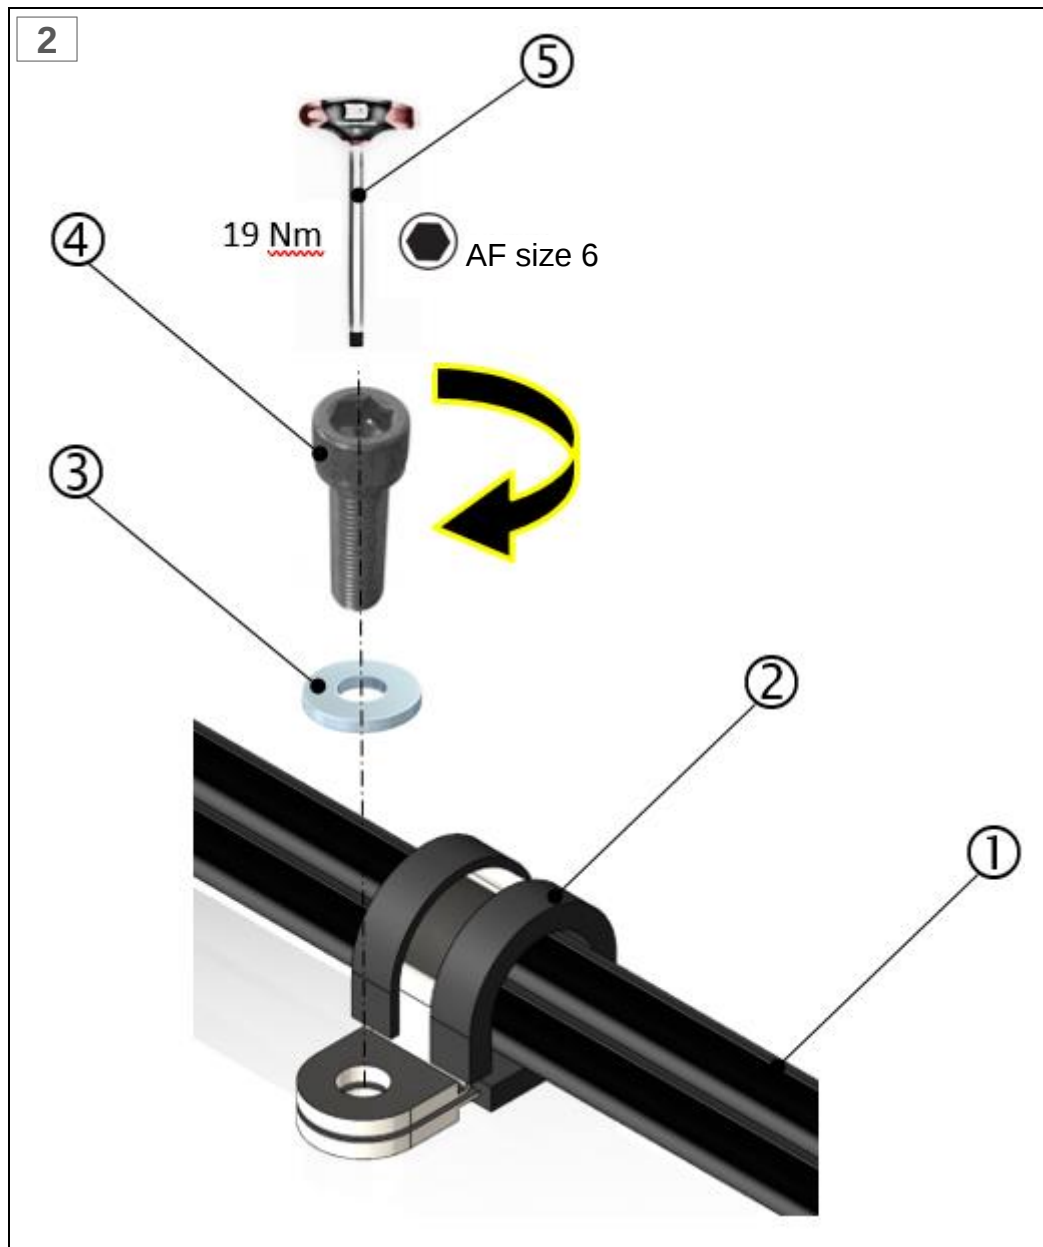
Installing the cable clamp for hybrid cable (steps 1-2)
